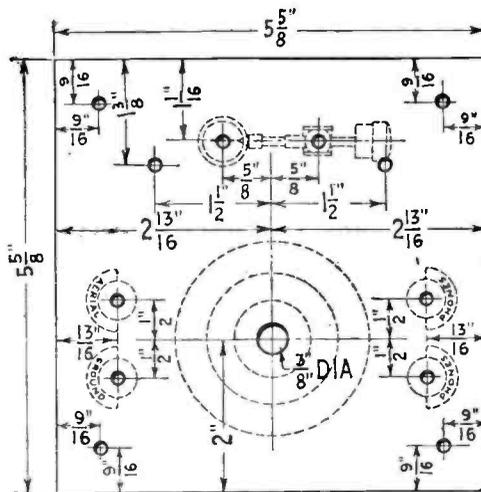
COMPLETE DRILLING LAYOUT FOR PANEL OF CRYSTAL RECEIVER. THE LOCATION OF PARTS AND BINDING POSTS IS INDICATED IN DOTTED LINES. PANEL MAY BE MADE OF CIGAR-BOX WOOD PAINTED WITH SHELLAC, OR BETTER STILL BAKE-LITE OR HARD RUBBER. ALL HOLES  $\frac{3}{16}$ " DIA. UNLESS OTHERWISE SPECIFIED IN DRAWING.
